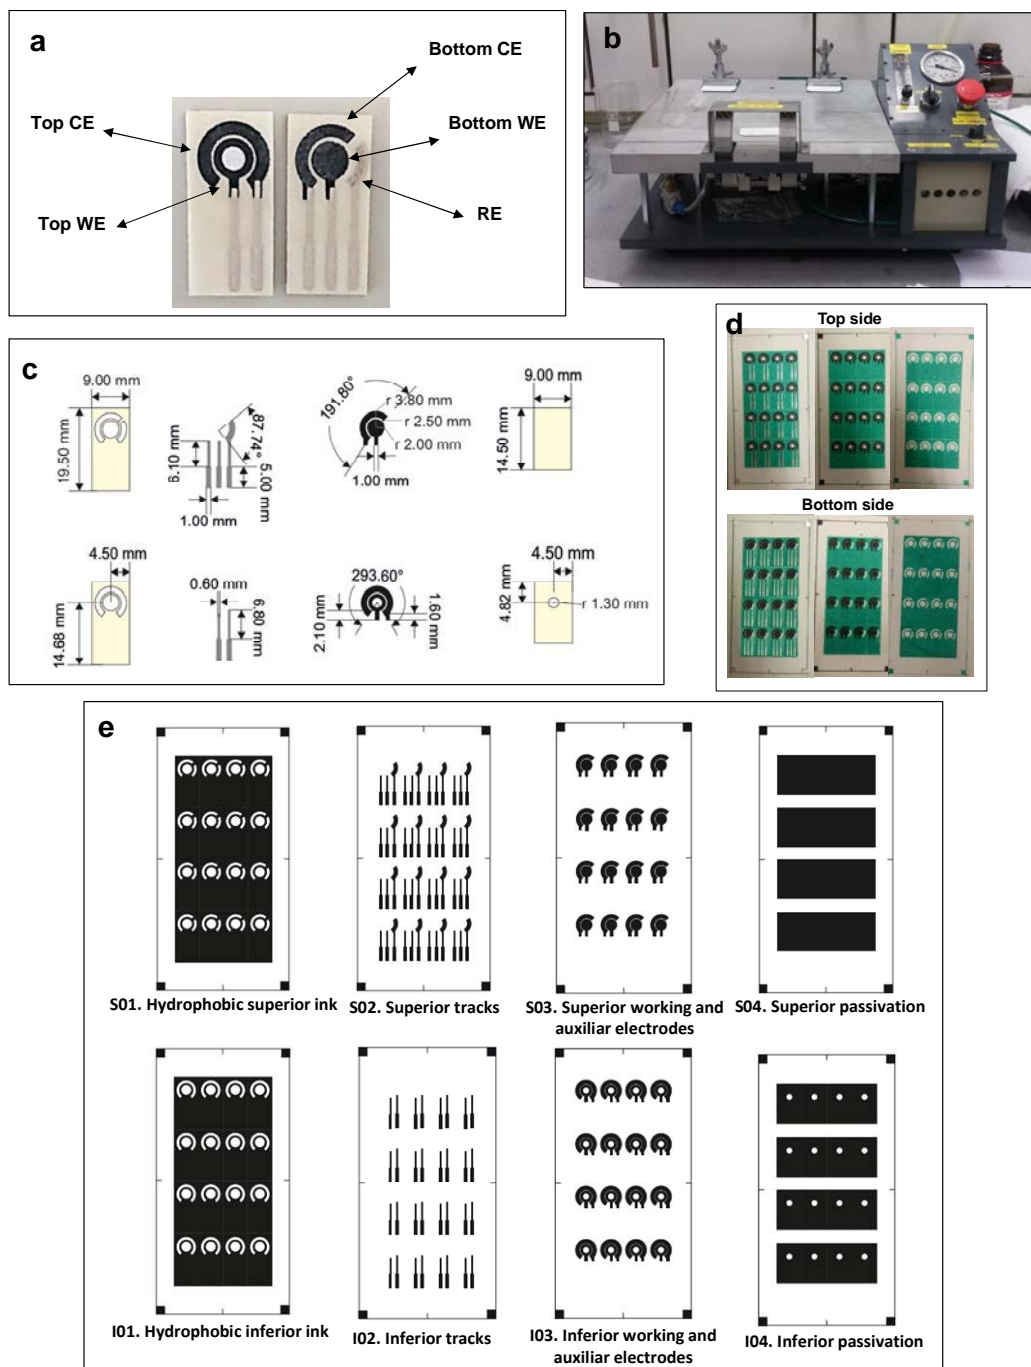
MP-dsSPCE fabricated in the IMB-CNM-CSIC. (a) Photography of the devices, with 2 electrodes printed on the top side and 3 electrodes screen-printed on the bottom side. (b) Photography of the commercial manual equipment used for printing. (c) Dimensions of the different electrodes. (d) Images of different printing stages. (e) Images of the masks used for printing.
